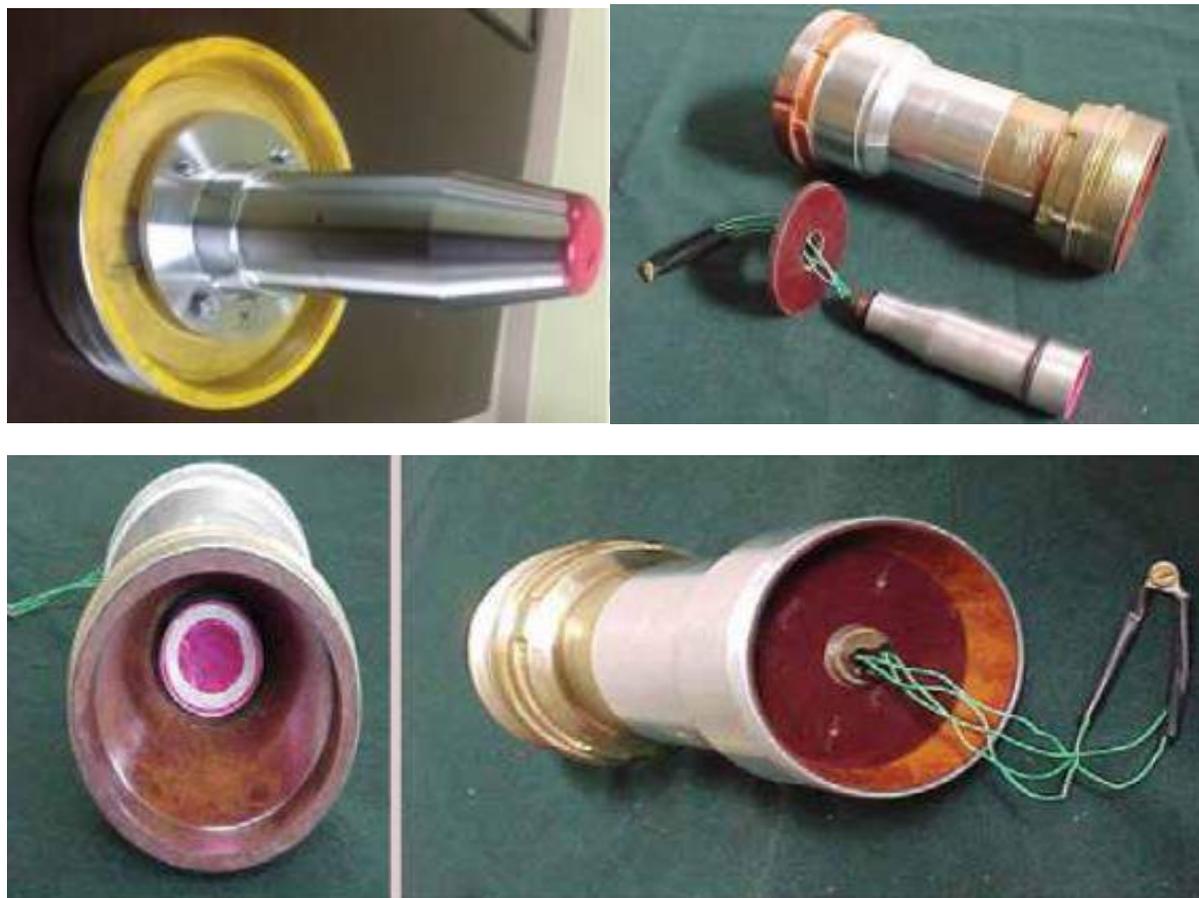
Alternative assembly of pyrotechnic igniter in SRM (Photograph)
